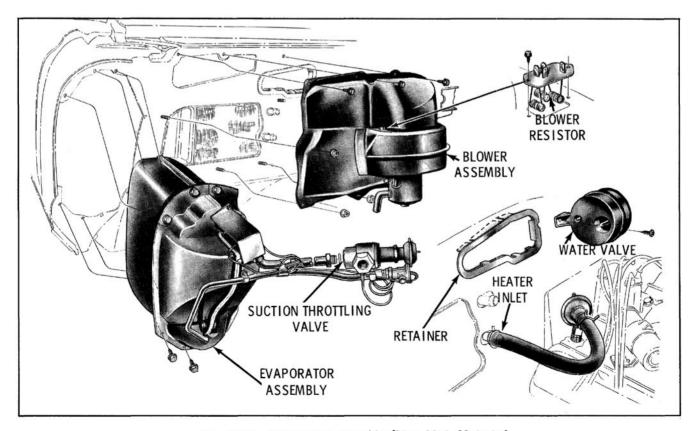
Blower Duct Assembly (30 - 31 & 32 Series)
